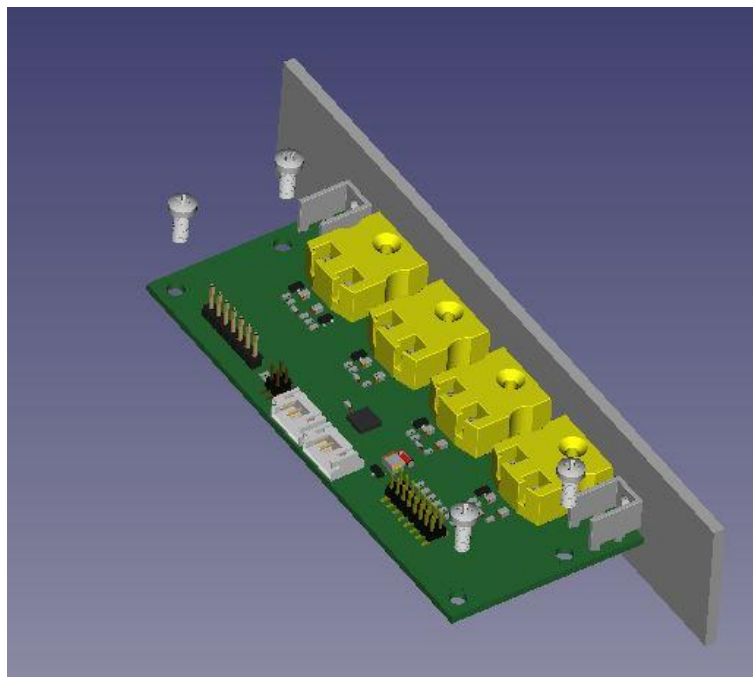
Attach the I2C-TC9600XP PCB to the bottom of the enclosure.
